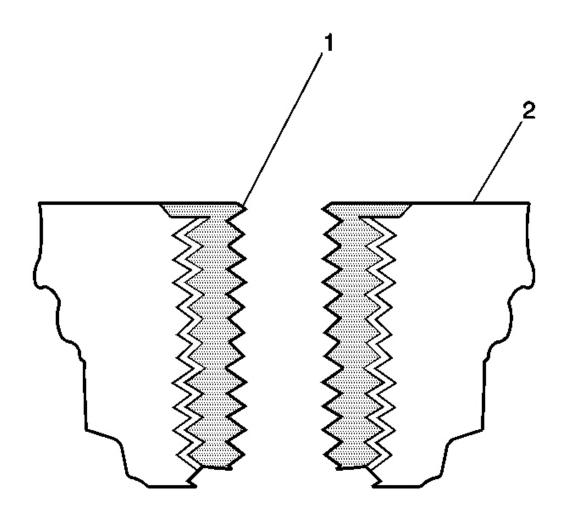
View Of Bushing Type Insert & Base Material Courtesy of GENERAL MOTORS CORP.
